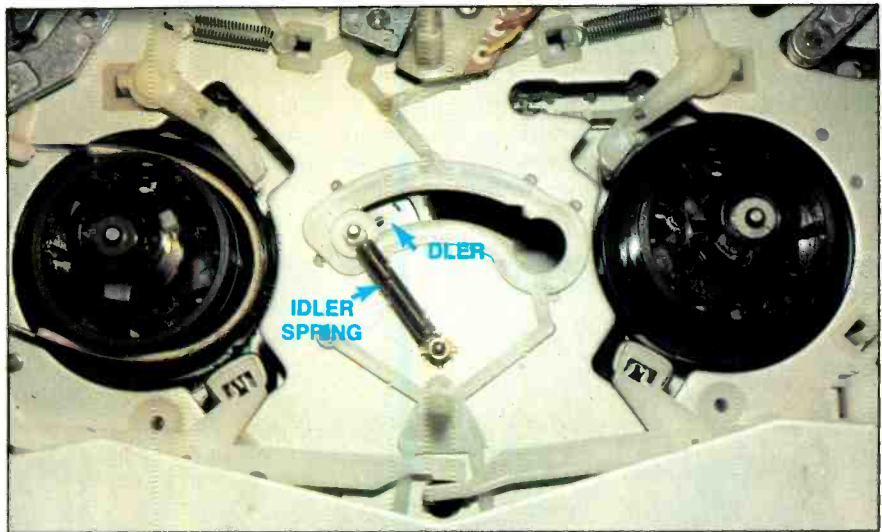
In this top view of the tape-transport mechanism, the idler is just visible underneath the chassis.
